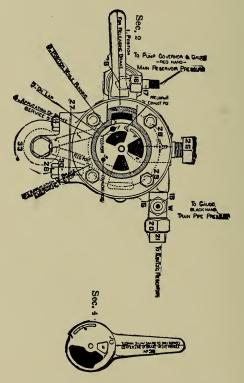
F-6 Brake Valve-Rotary and Seat.
